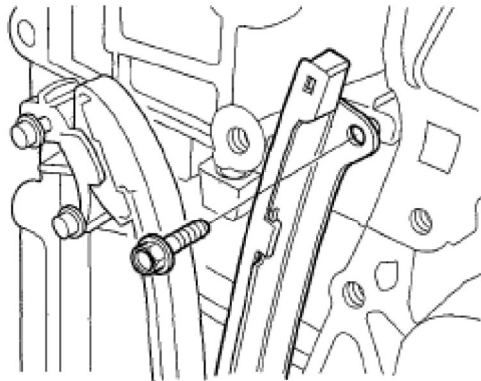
Identifying Top Bolt That Secures Cam Chain Guide
